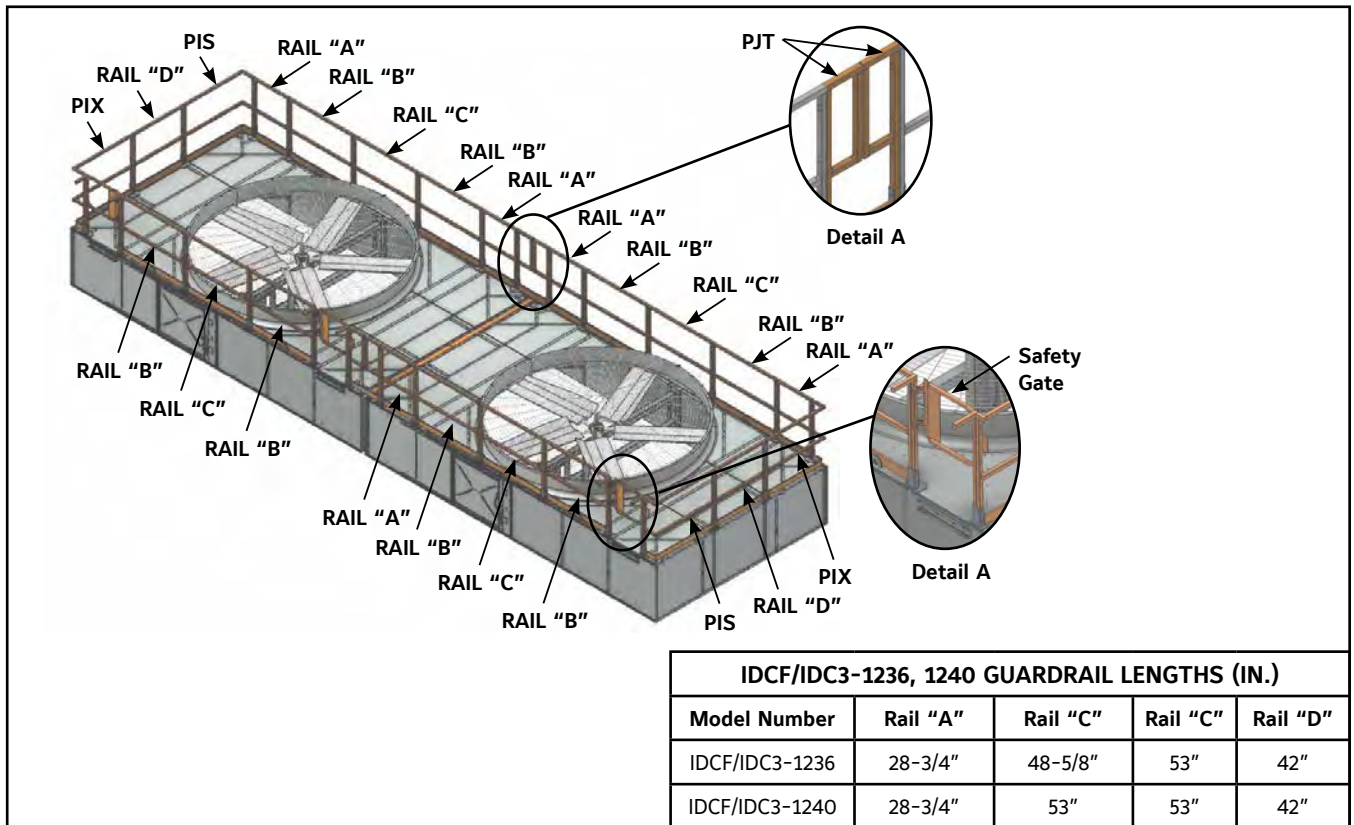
Top Perimeter Guardrails - IDCF/IDC3-1236, 1240
